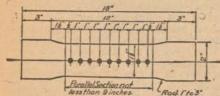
(d)—Standard rectangular tension-test specimen with 8-inch gauge length.
